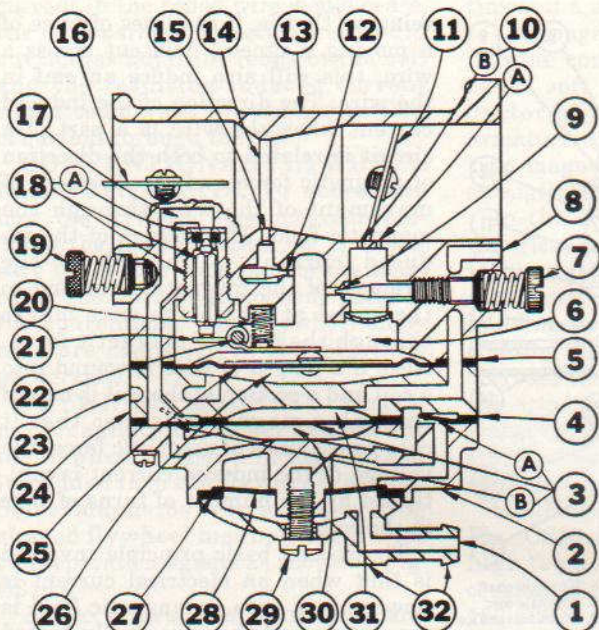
Cross-sectional schematic view of Tillotson series HL diaphragm carburetor. Some models of this type carburetor are equipped with an accelerator pump
